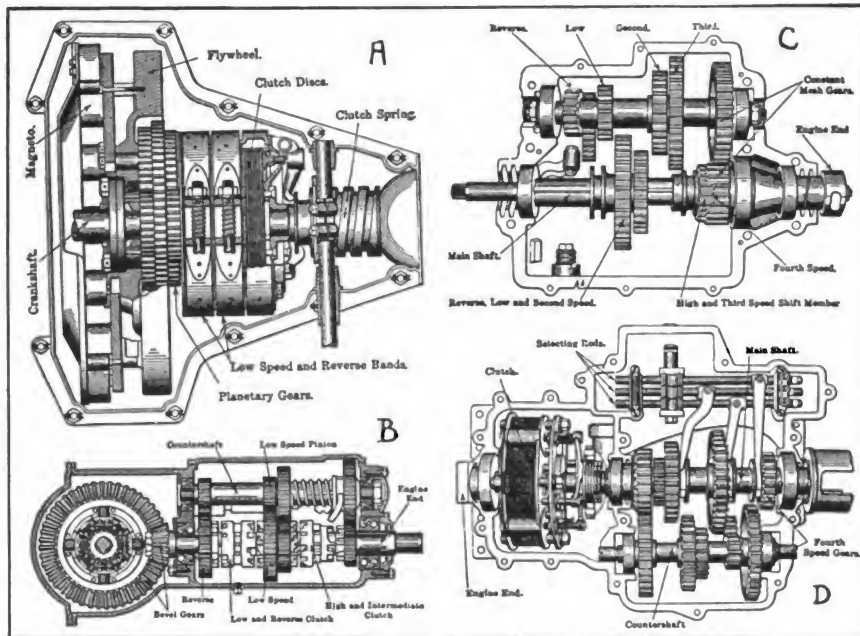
TYPICAL CHANGE SPEED GEAR DESIGNS. A. PLANETARY GEARSET OF FORD—B. INDIVIDUAL CLUTCH TYPE WITH GEARS ALWAYS IN MESH.—C. WHITE FOUR SPEED SLIDING GEAR SET.—D. WINTON MULTIPLE DISC CLUTCH AND FOUR SPEED SLIDING GEARSET
